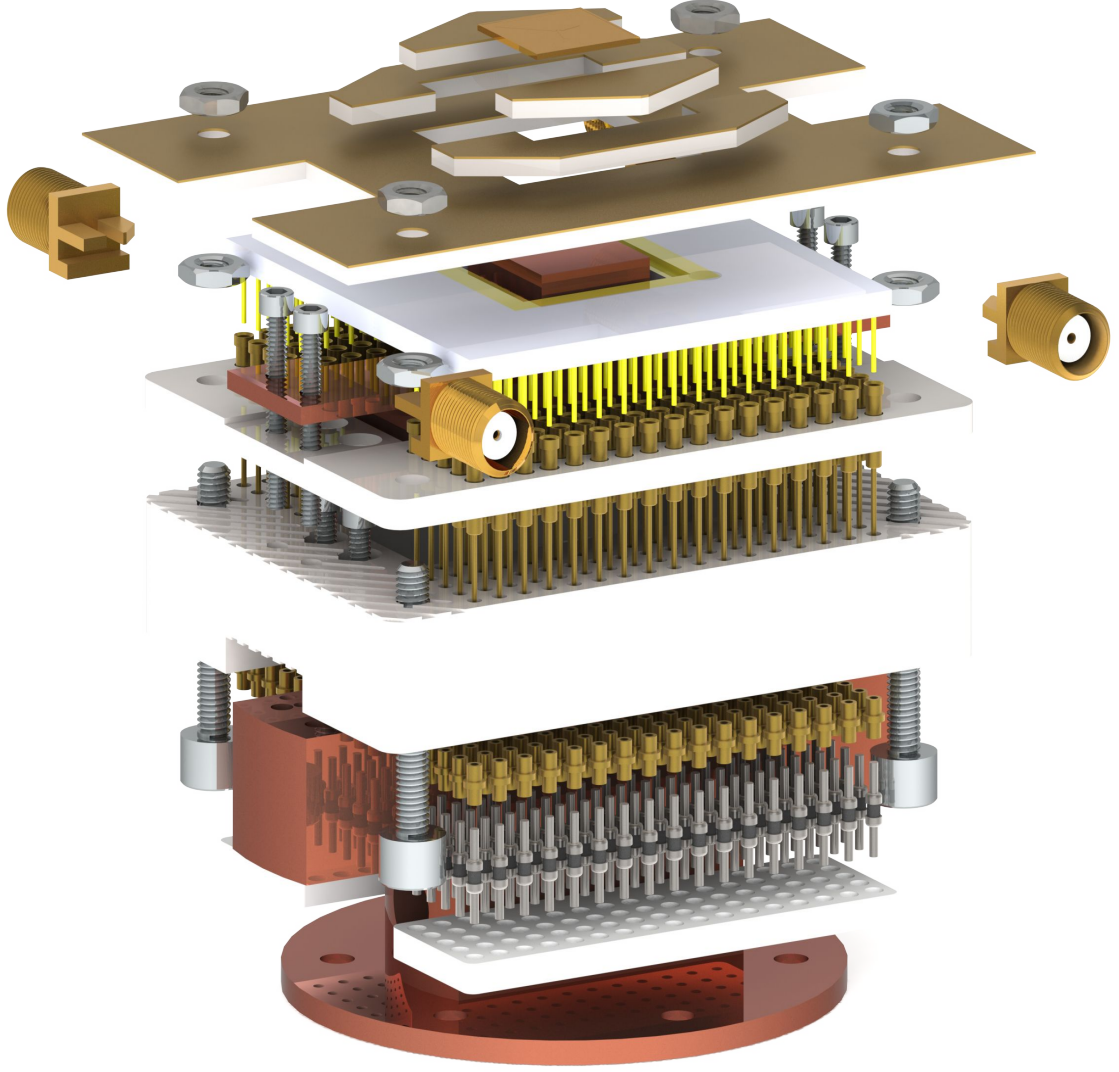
Exploded view of chip mounting structure with in-vacuum filtering.
